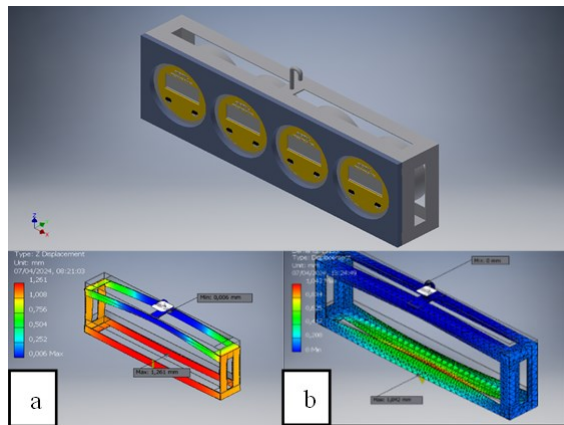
(a) Frame design version 1. (b) Frame design version 2
